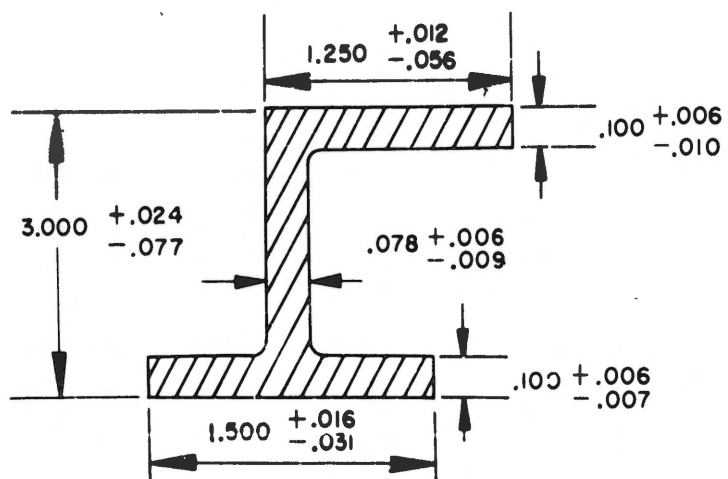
Typical Example of Dimensional Changes During Stretch Forming
